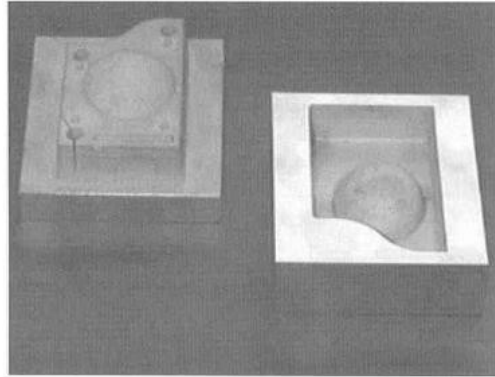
Injection molding tool fabricated with the Pro Metal system (Courtesy of Extrude Hone Corp.)
